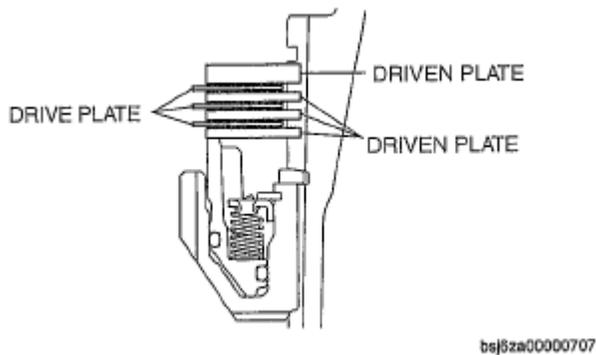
Identifying Driven Plates, Drive Plate And Retaining Plate
